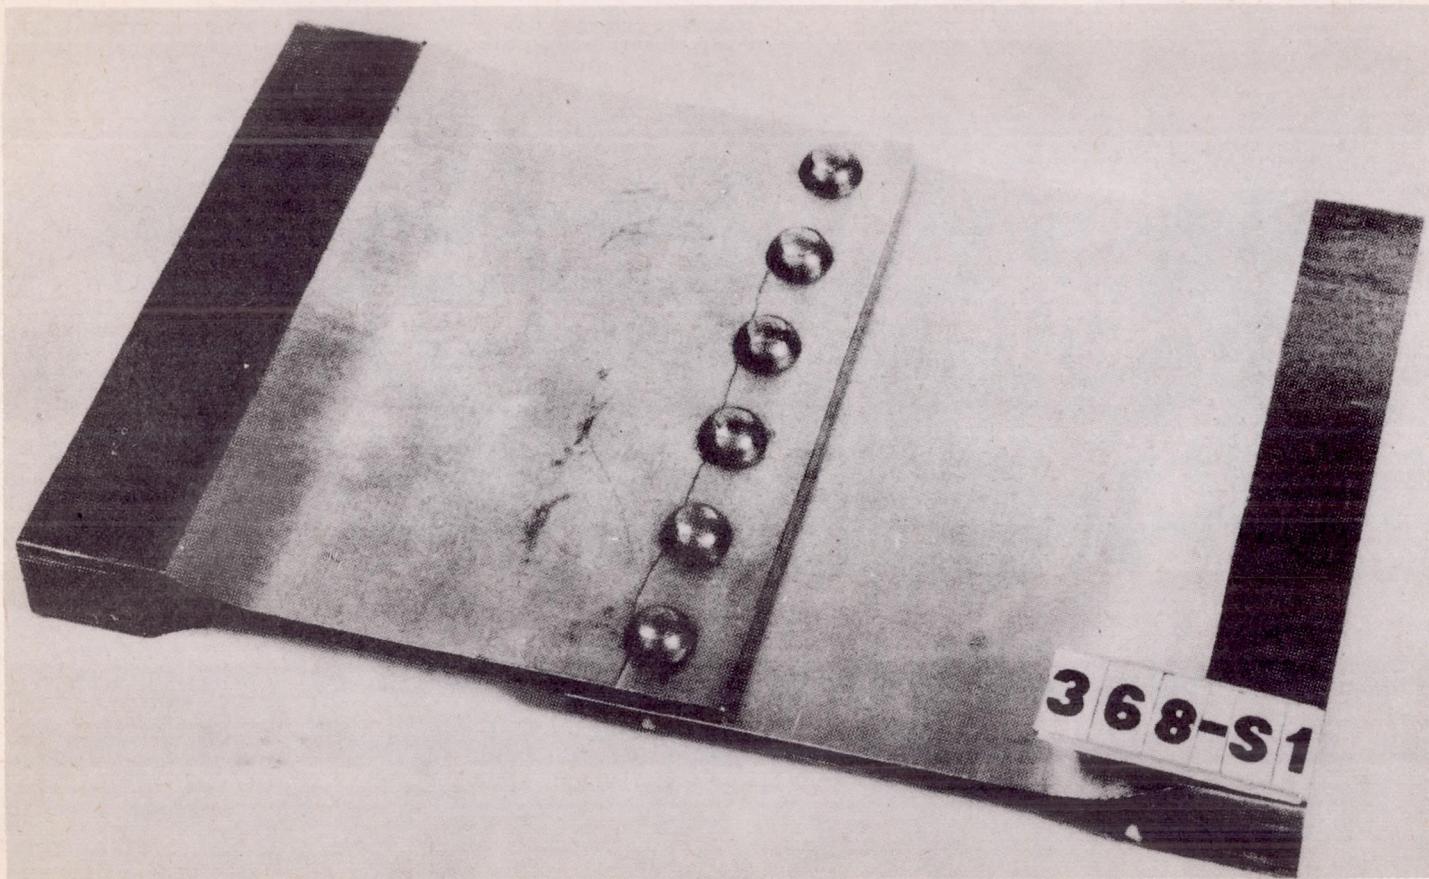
Fracture of type S specimen showing failure in plate at edge of rivet heads.
